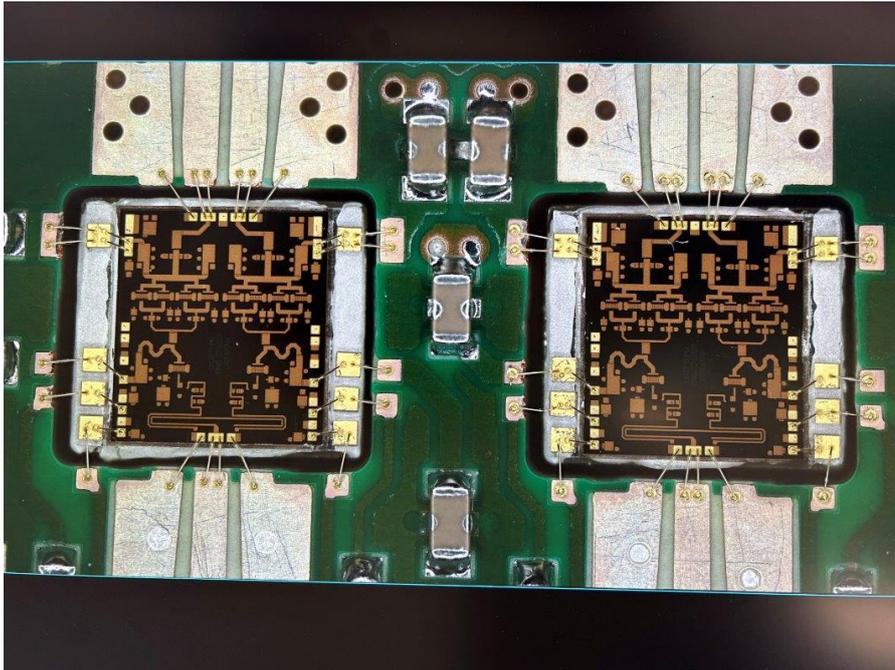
DRIFT MMIC and Die-Cap attach and wire bonding.
